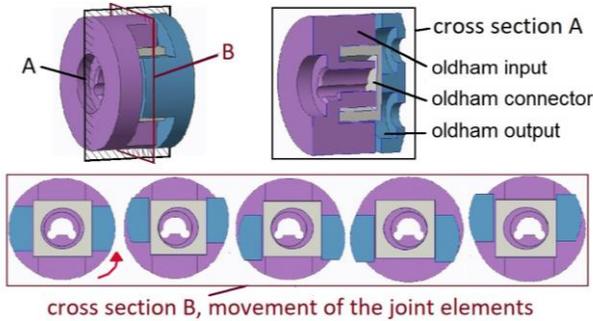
Design of the miniaturized Oldham coupling joint. Top left: assembled Oldham coupling. Top right: cross section 'A' of the assembled joint. Bottom: cross section 'B' of the assembled joint showing the sliding movement of the single parts with respect to each other.
